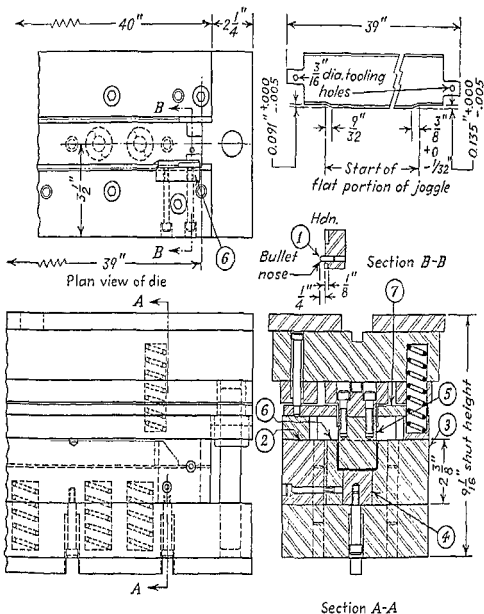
Die for joggle and flange forming in a press brake. (The Emerson Electric Mfg. Co.)
